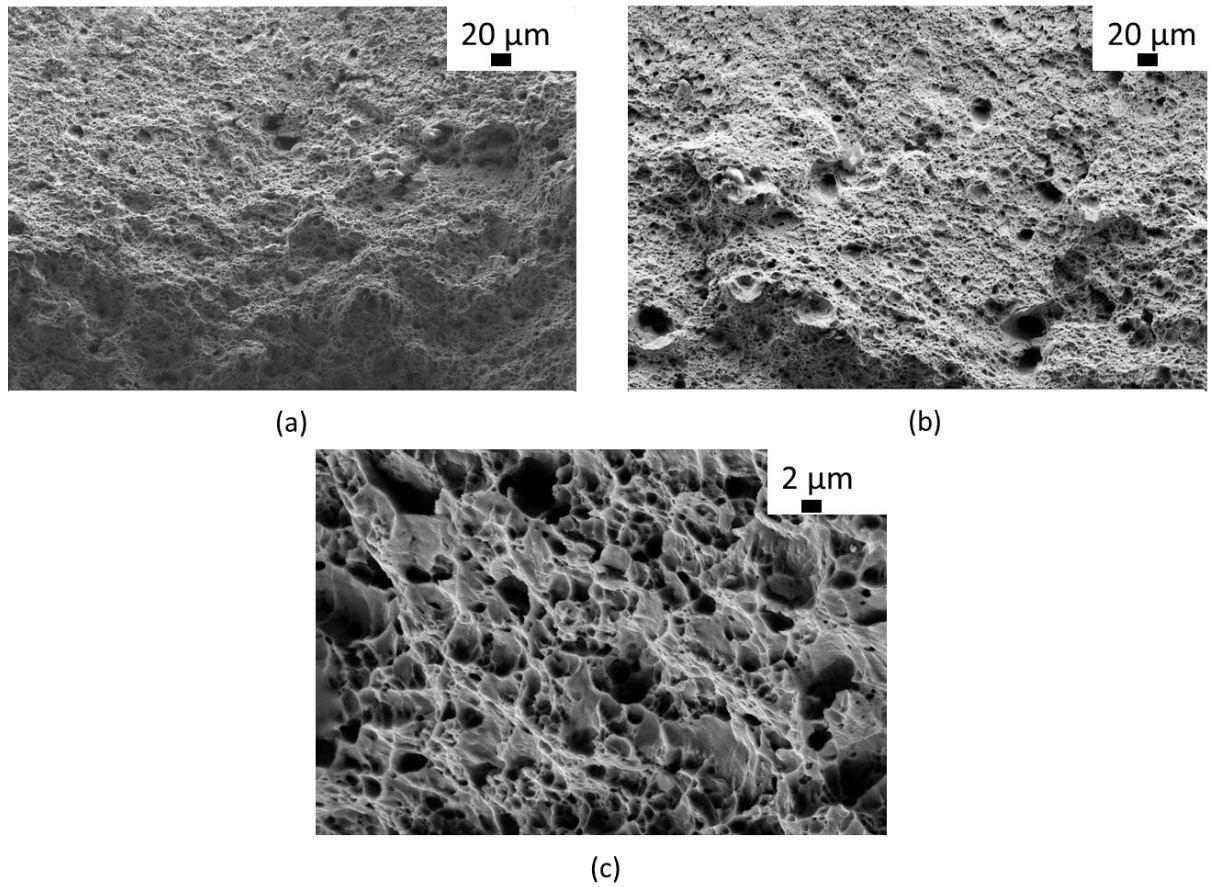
Fracture surface under higher magnification showing a typical ductile fracture. (a) uncharged forged specimen (b) uncharged cast specimen and (c) forged specimen pre-charged in a 5% NH₄SCN solution.
